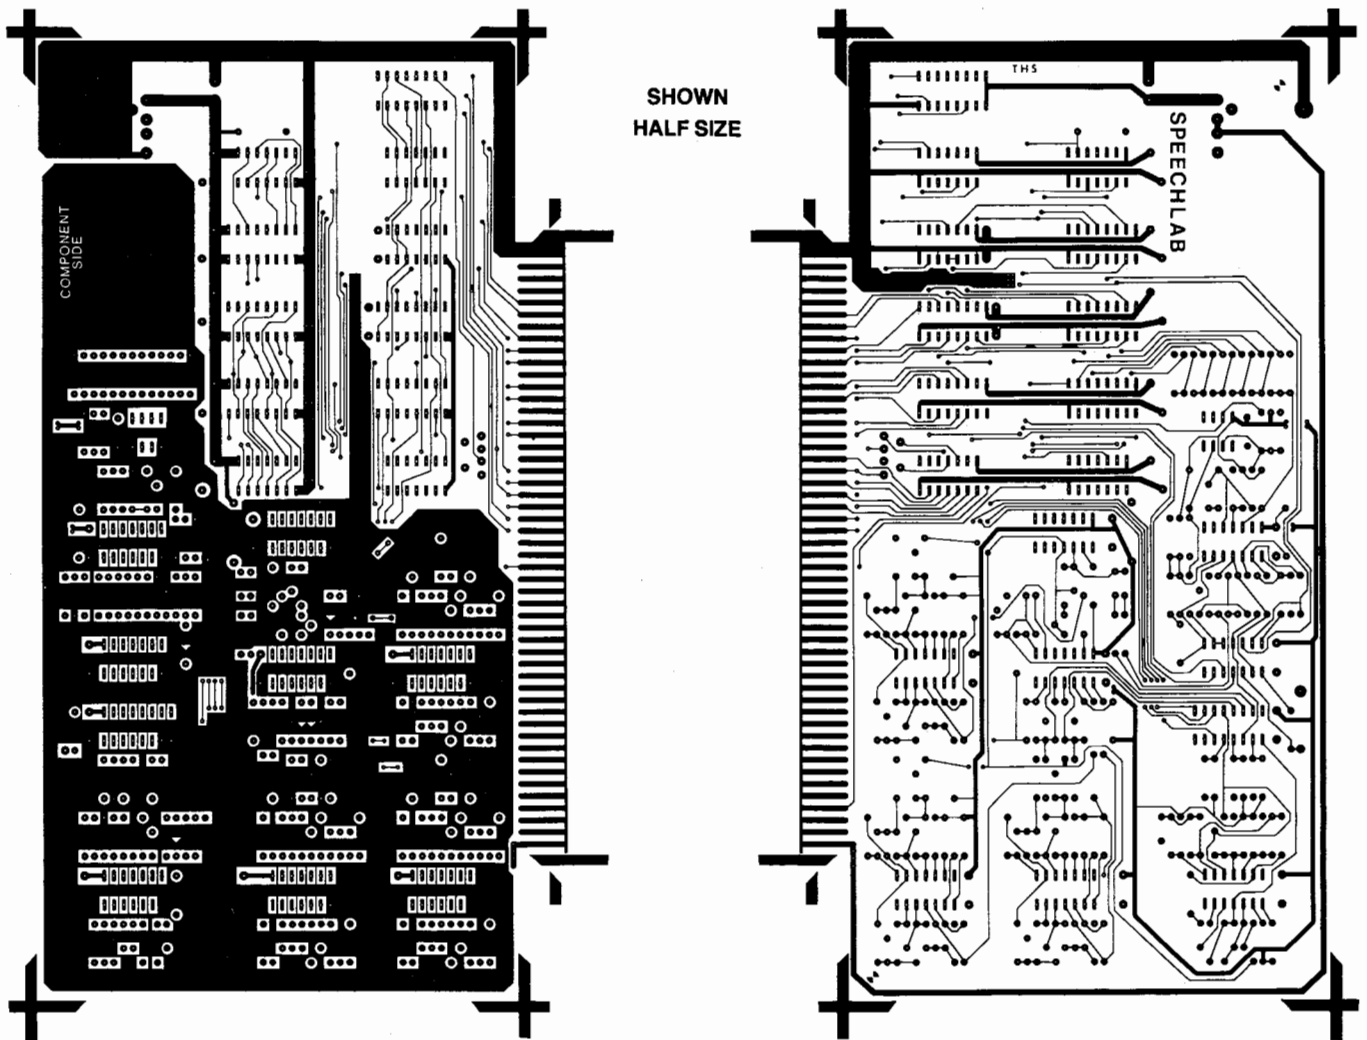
Etching and drilling guides for pc board are shown half size. Guide at left is the component side. Component layout is in Fig. 9.
